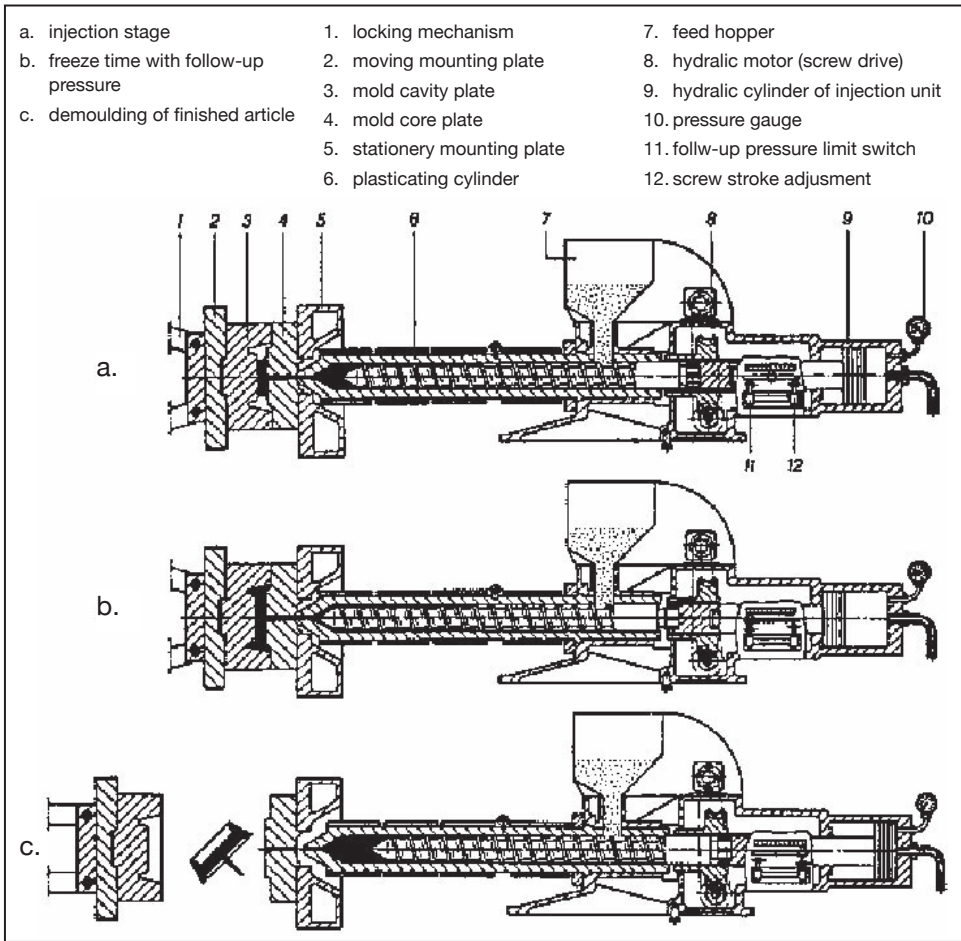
Construction and Mode of Operation of a Reciprocating Screw Injection Unit
